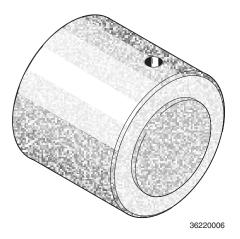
Flame Arrestor Snubber Diffusion Assembly
